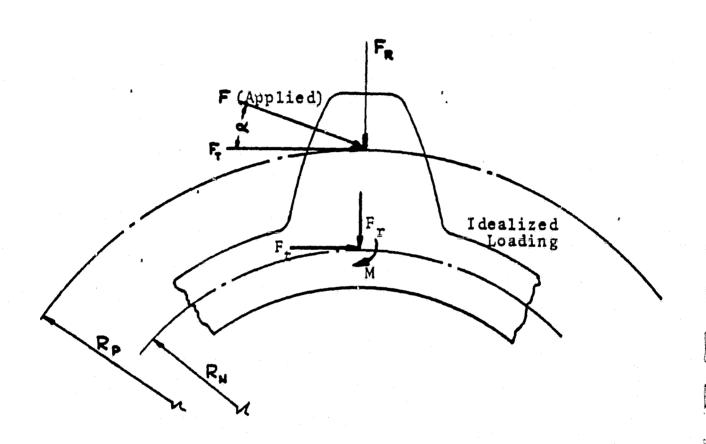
IDEALIZED GEAR TOOTH LOADS
